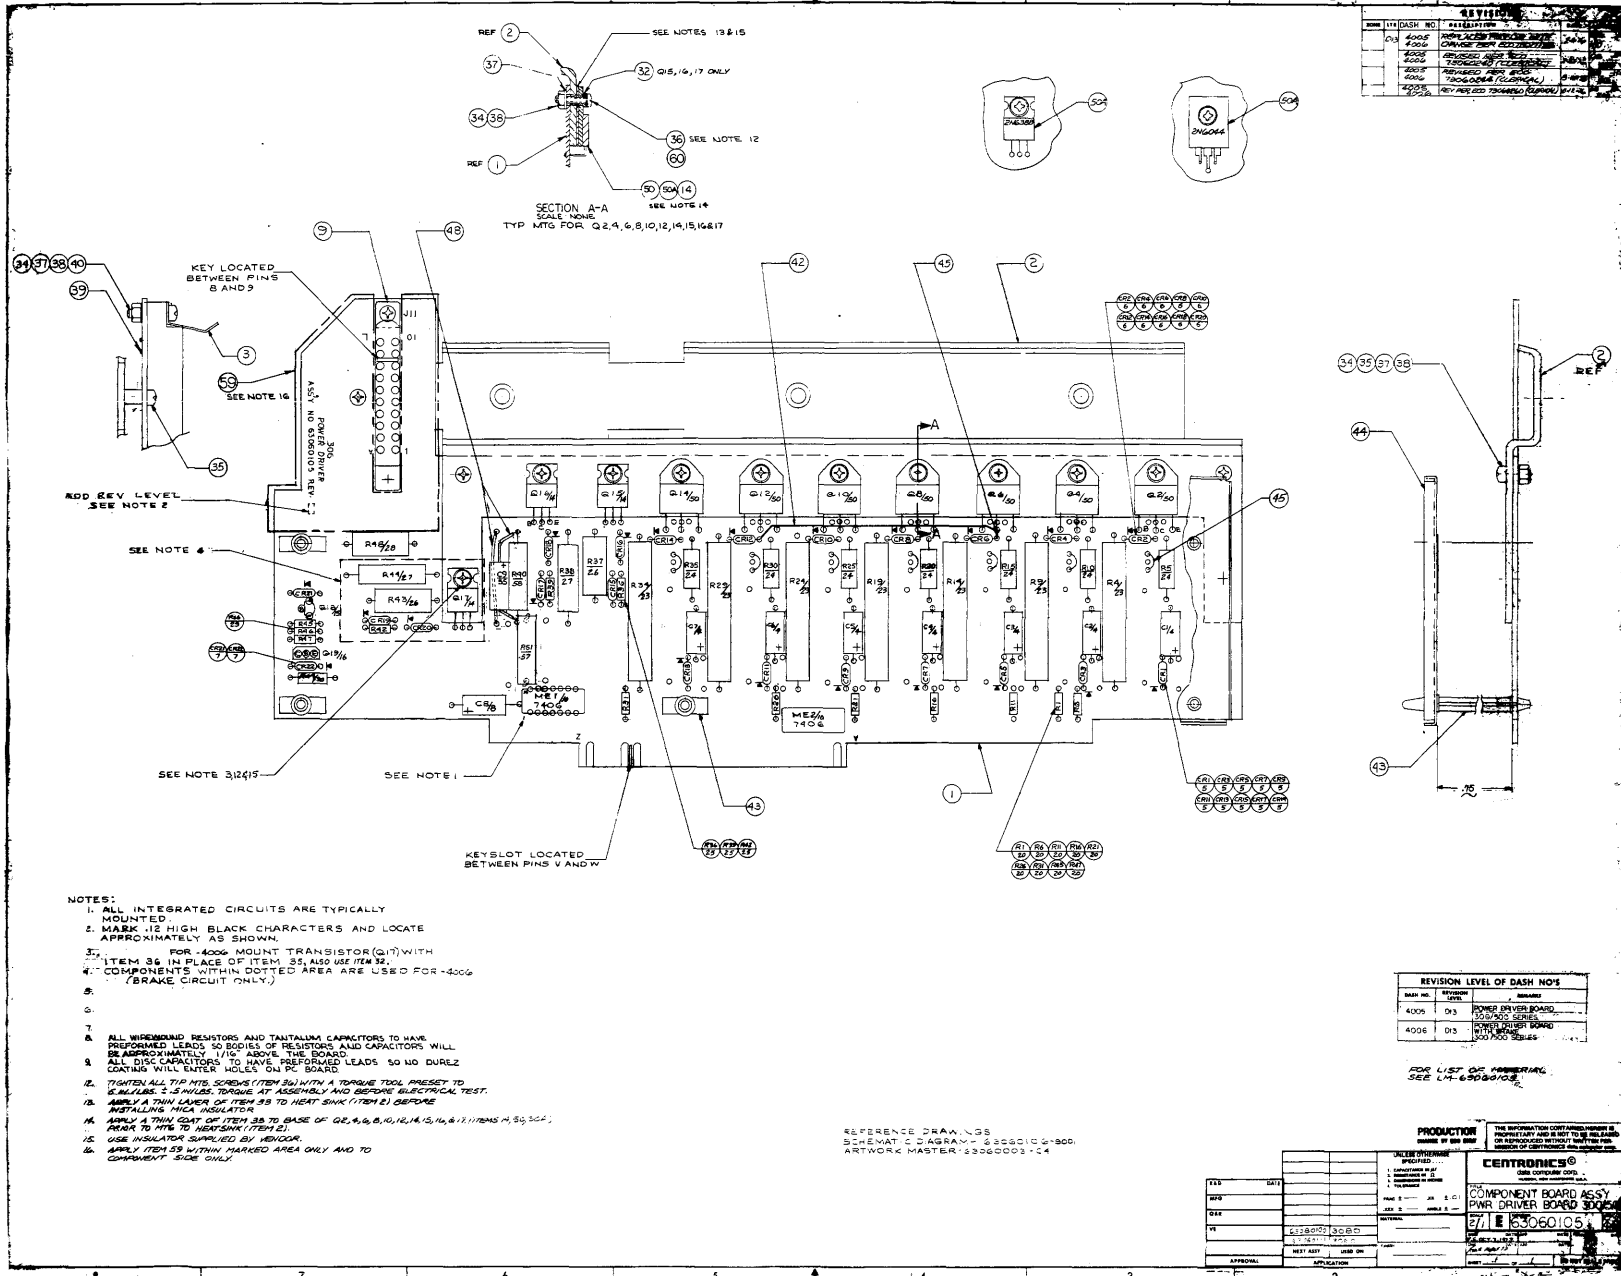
PC BOARD ASSEMBLY, POWER DRIVER BOARD
